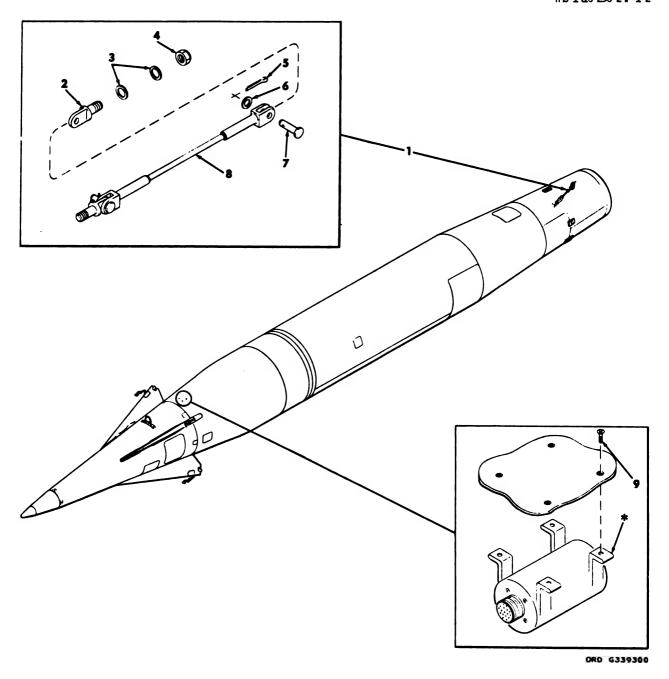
SHIPPING KIT, FORWARD AND AFT BODY ASSEMBLY, INSTALLED /8530406 AND 9979611/
